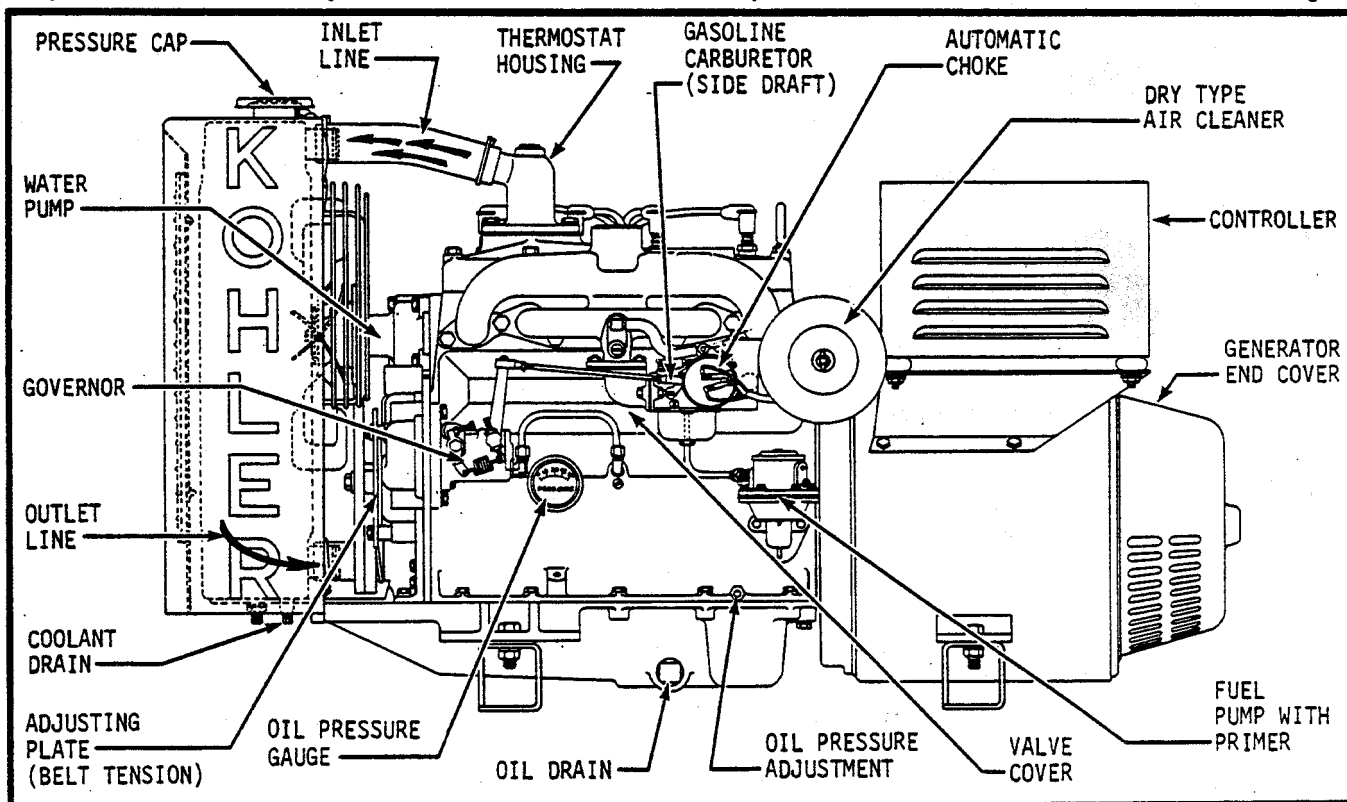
CARBURETOR SIDE VIEW - TYPICAL RADIATOR COOLED PLANT WITH L654 ENGINE
